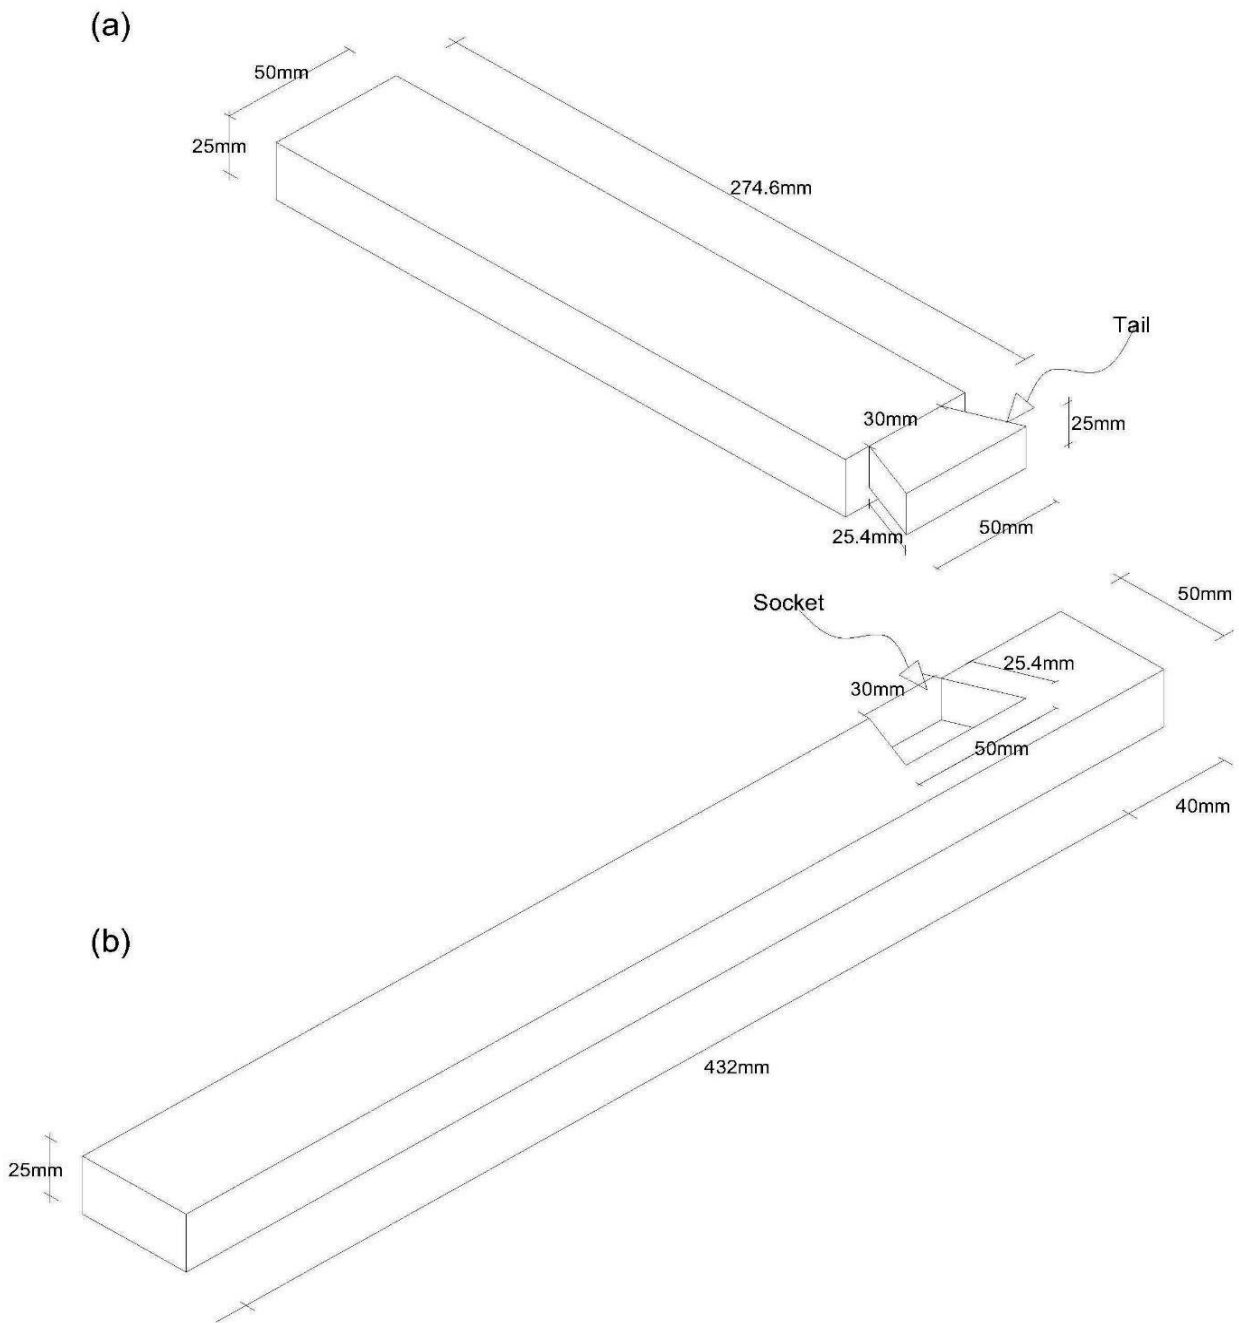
Schematic illustration of the rail (a) and leg (b) of Type SS dovetail joint showing the final dimensions of the tail and socket (Scale = 1:2.5).
